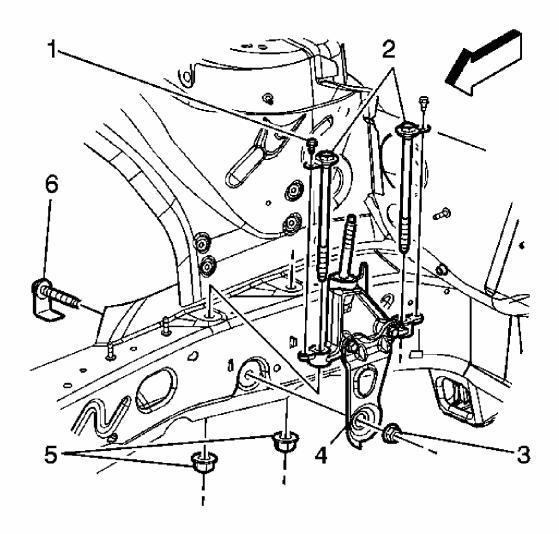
View Of Engine Mount Strut Bracket & Bolts Courtesy of GENERAL MOTORS CORP.
